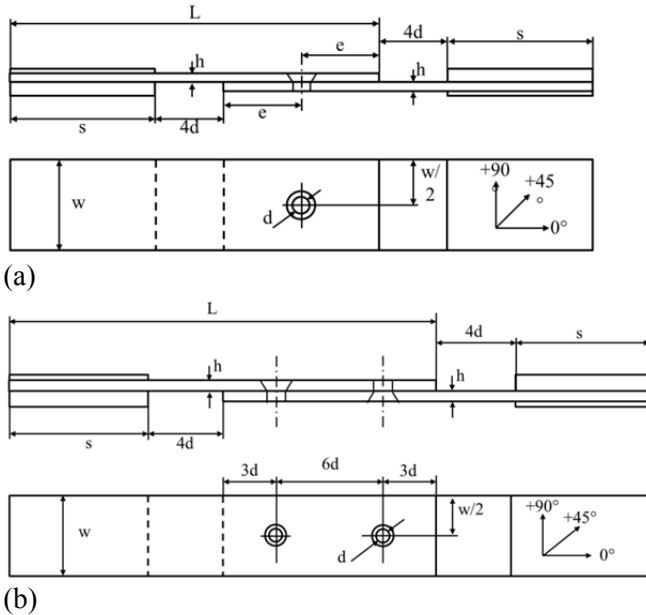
Specimen geometry for (a) one bolt or (b) two bolts, all dimensions are in millimetre [mm].
